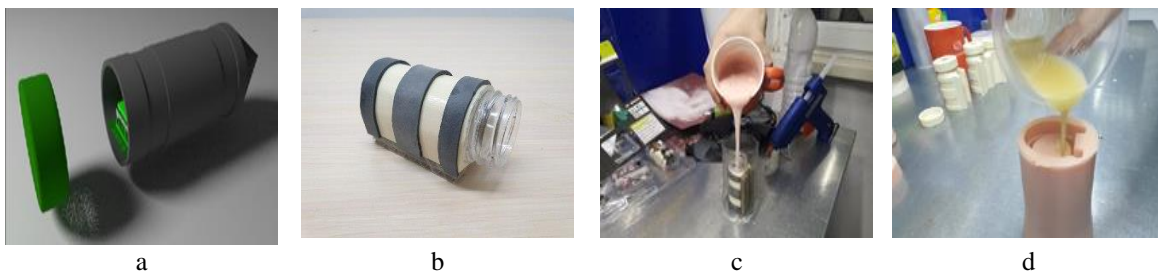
Design and fabrication of a silicone mold for a cylindrical body
